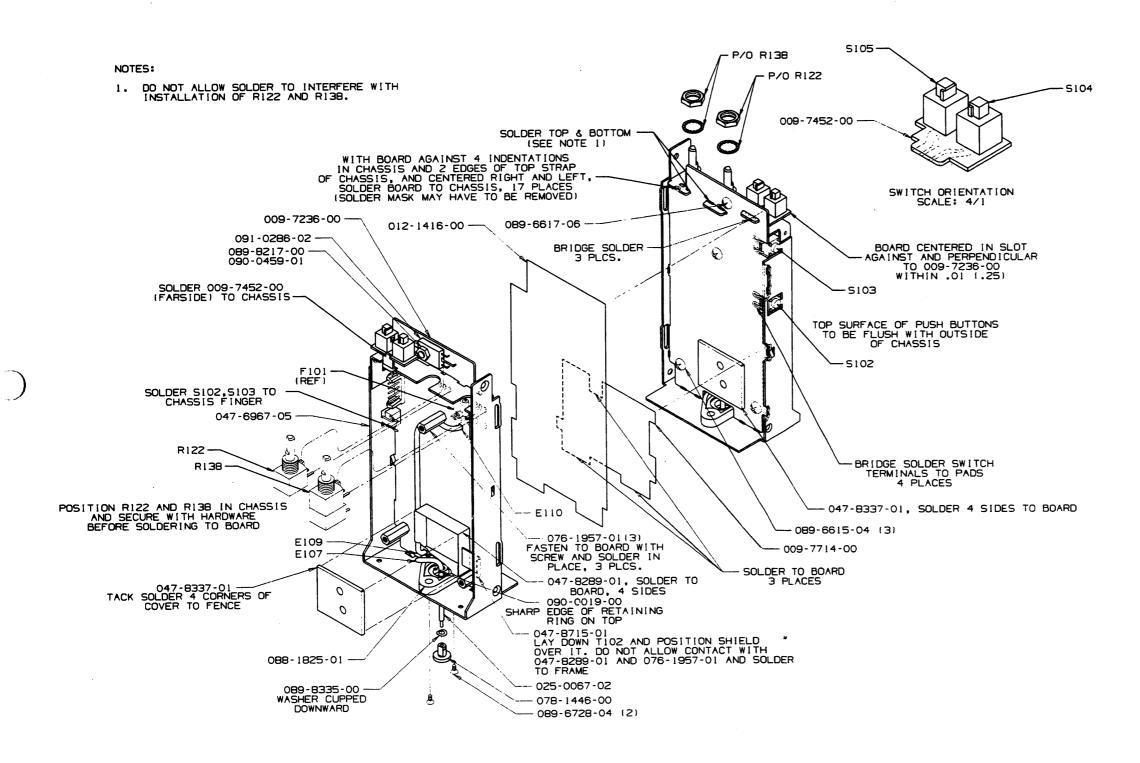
AUDIO/SYNTHESIZER BOARD ASSEMBLY (Dwg No 300-7236-00 R-2) (Sheet 2 of 2)
